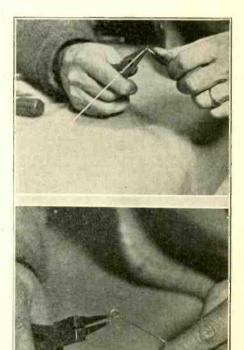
(top), the proper way to bend busbar. Never attempt to bend the wire to a right angle. The corner should be rounded. Fig. 2 (bottom), round-nosed pliers should be used in looping the wire to fit over the terminal binding post. This is easier than a soldered connection. Fig. 2A shows simple home-made device for bending.
